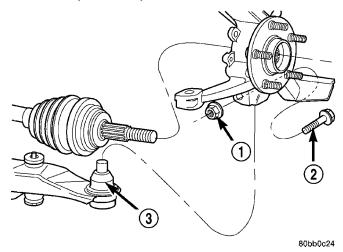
Halfshaft Installation Into Hub And Knuckle
